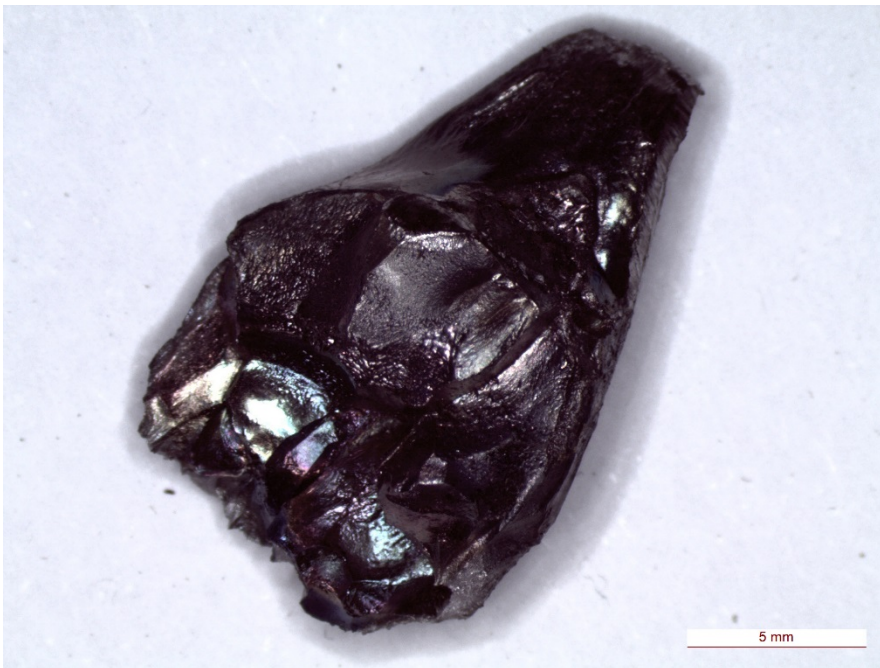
Stereoscope image of intergranular fracture below final failure, steel C
